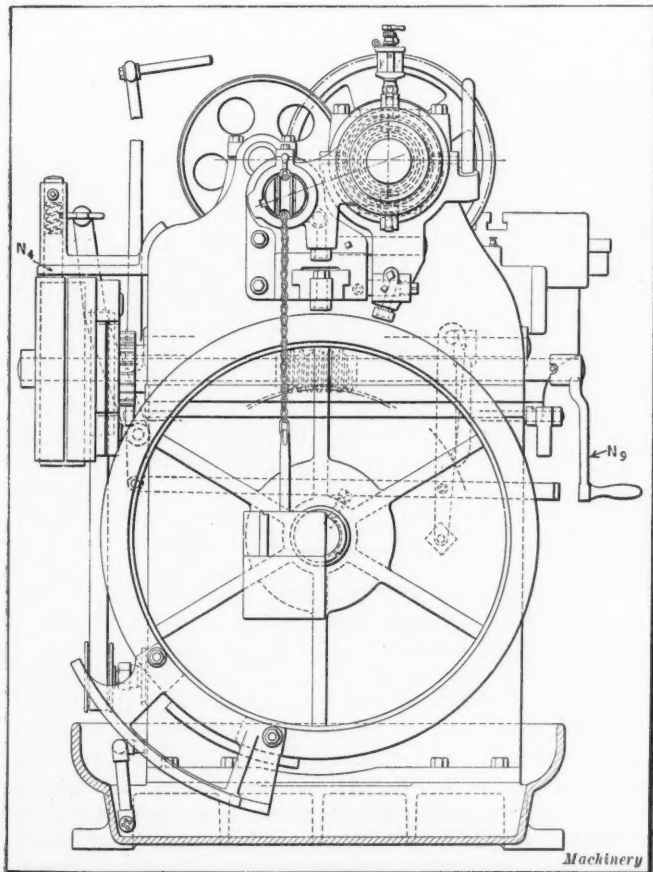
Rear End View, showing Power Feed Mechanism and Main Cam Drum
